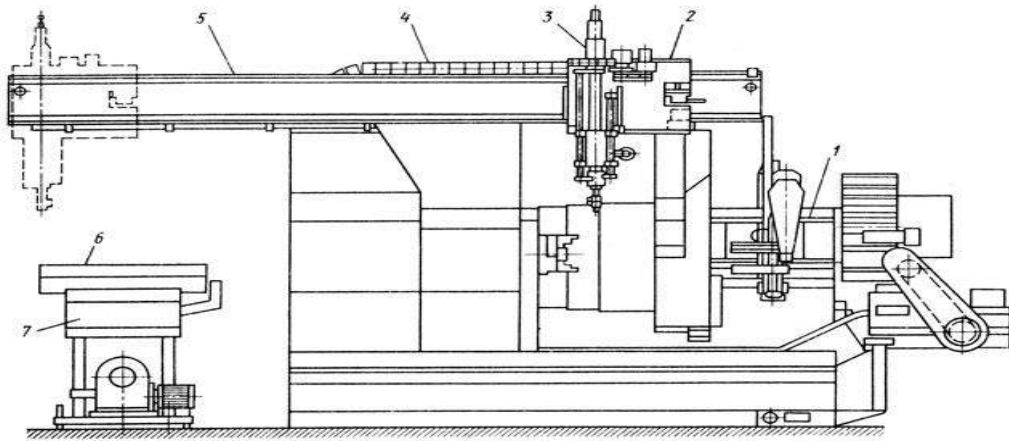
Cantilever automatic manipulator: 1 - machine; 2 - manipulator carriage; 3 – manipulator unit; 4 - cable chain; 5 - traverse; 6 - parts store (pallet); 7 - sub-pallet station
